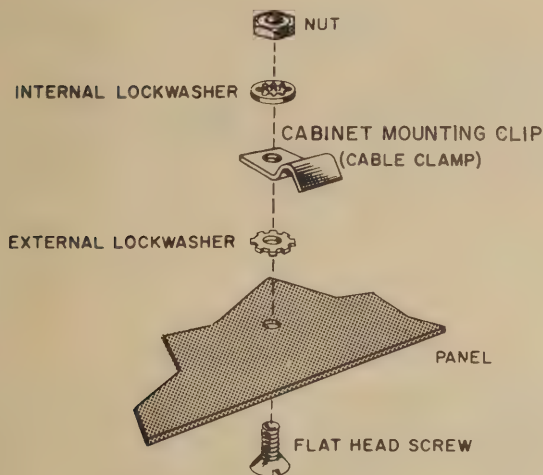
HOW TO ASSEMBLE THE CABINET CLAMP
